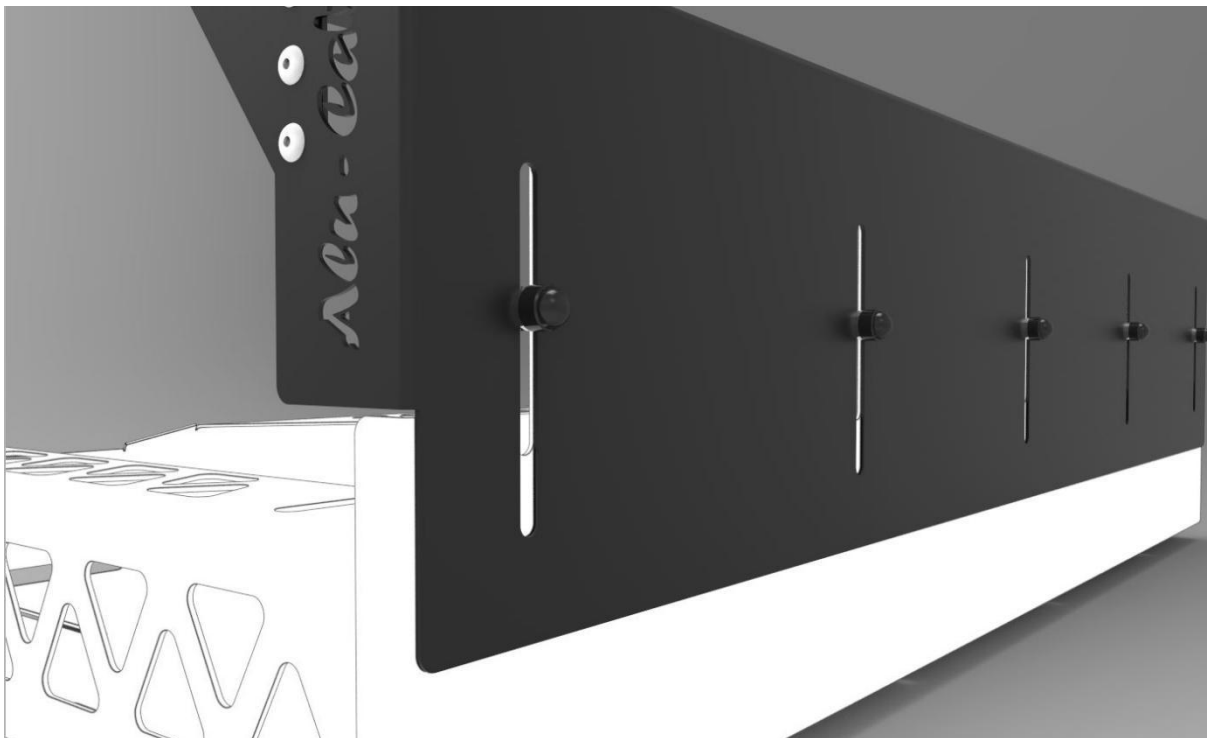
To finish this assembly we place a Nut Cap on each Nut
